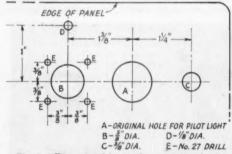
Dimensional layout for mounting the fuse holder, r.f. input and r.f. output connectors. The fuse holder mounts in the hole originally used for the pilot light. This view is from the rear of the panel.
